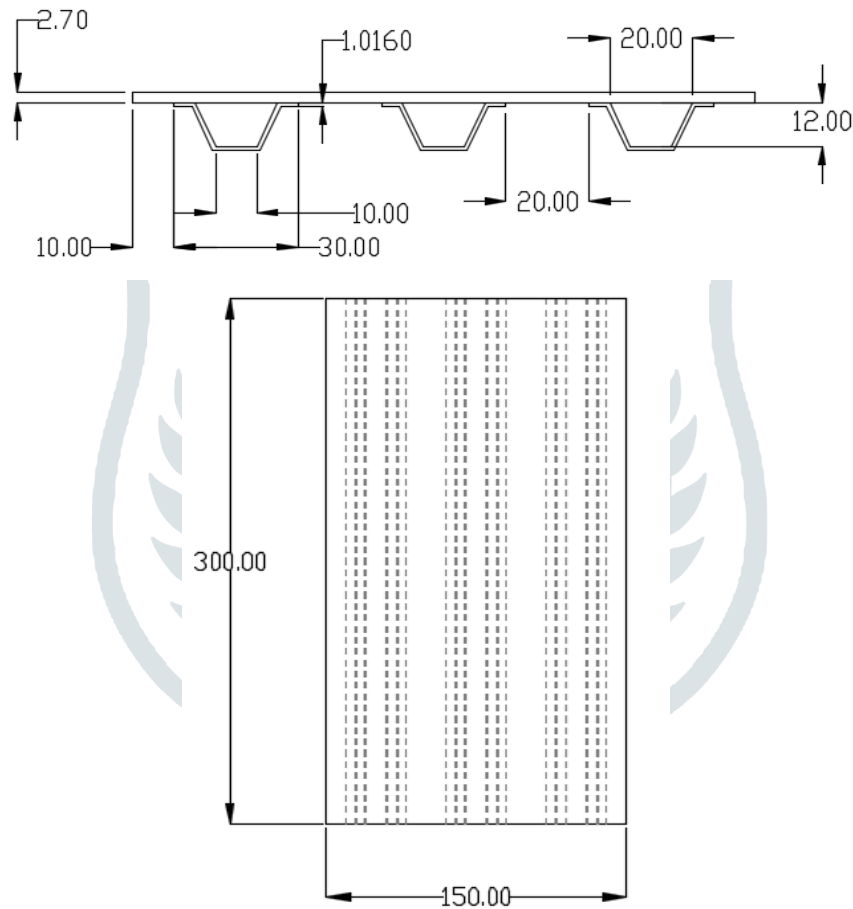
CAD geometry of the Single shell laminate with stiffener (All dimensions are in mm)
